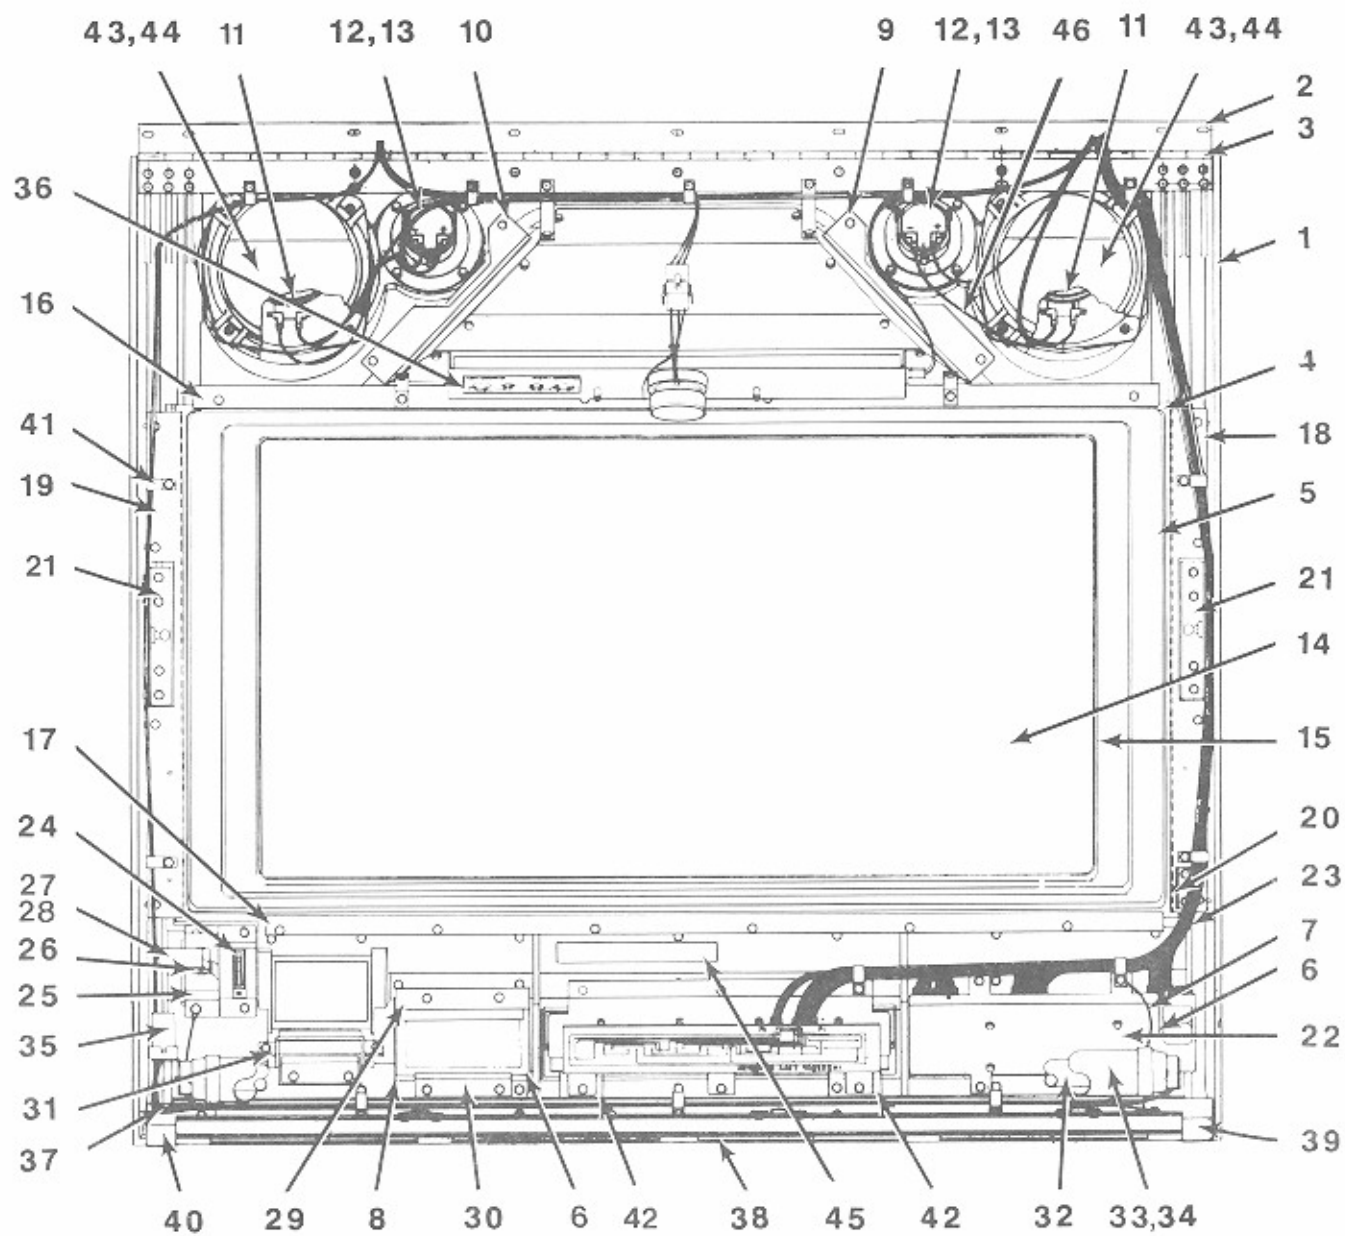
CD-100B Top Door Assembly, Sheet 1
